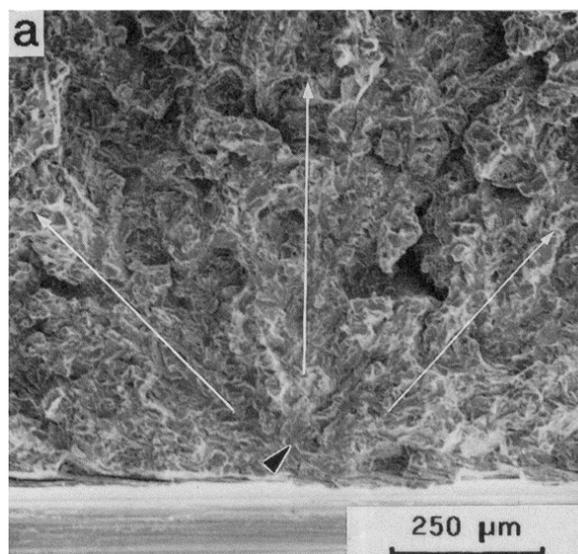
River patterns indicating the location of cleavage fracture initiation.
